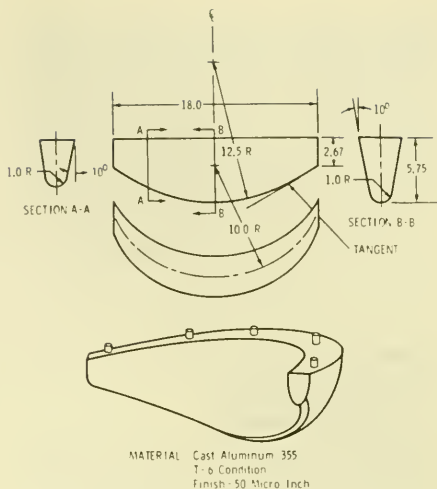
Diagram of Bead Unseating Block Dimensions in Inches
